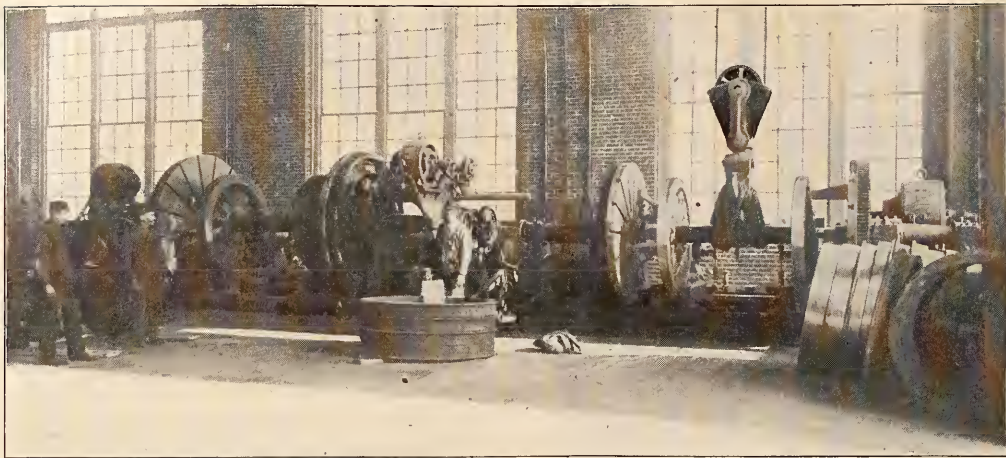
NILES WHEEL LATHES IN LOCOMOTIVE AND MACHINE SHOP, SERVED BY TRAVELING CRANE—
